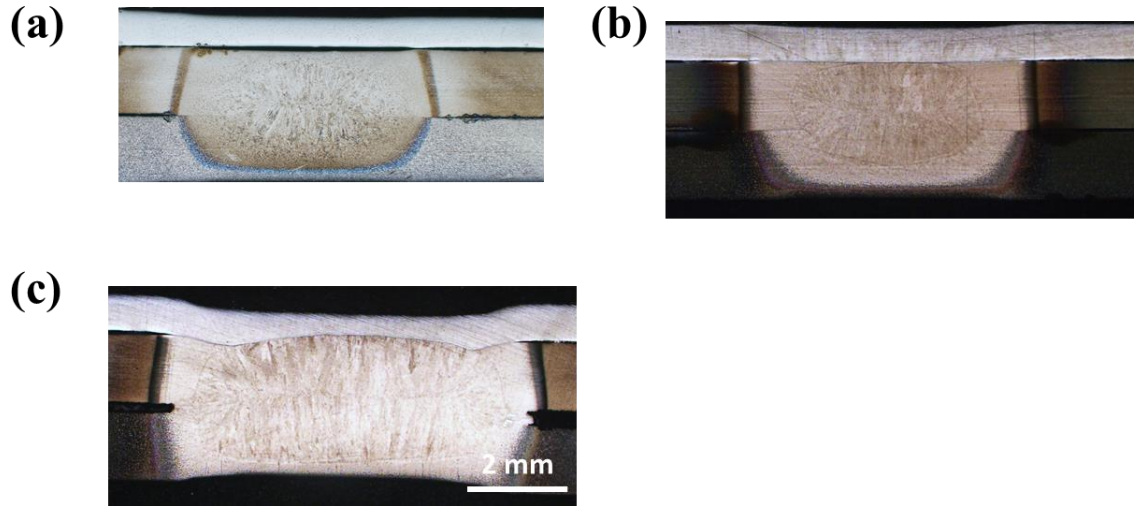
Optical micrograph of resistance spot welded 3T stack-up at welding current of (a) 5 kA, (b) 6 kA, and (c) 9.5 kA. Other welding parameters are electrode force: 3.4 kN, and welding time: 300 ms
